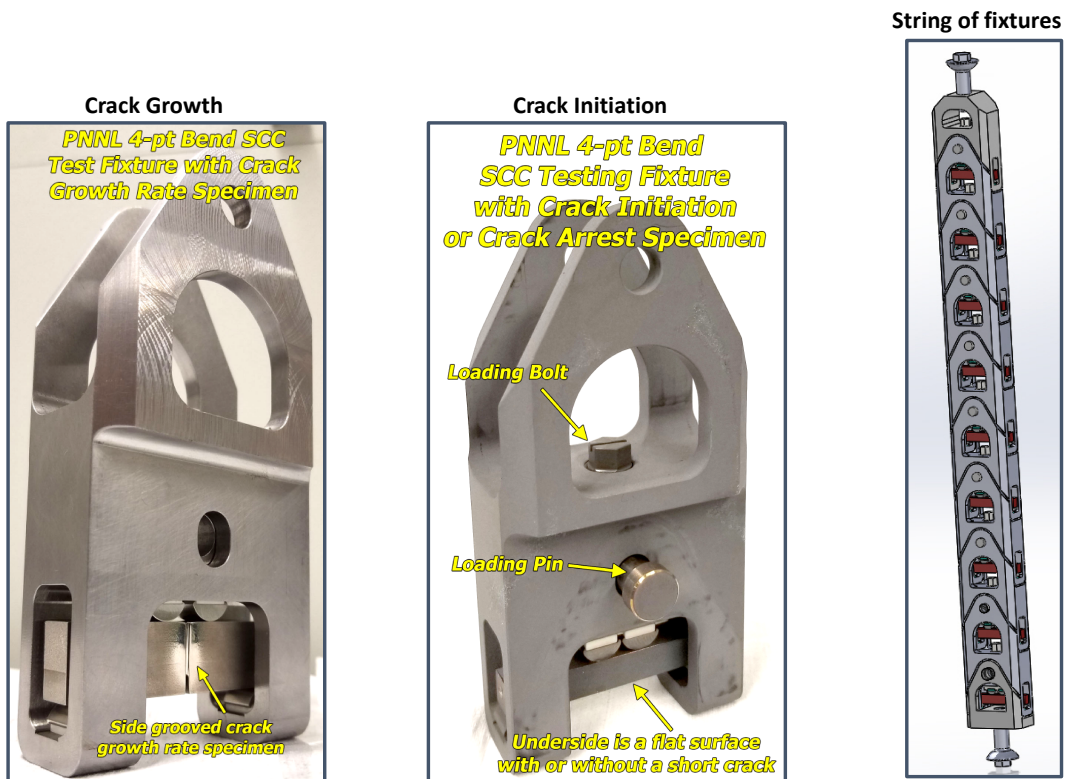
Two images of actual fixtures and a rendering of a string of nine specimens.
